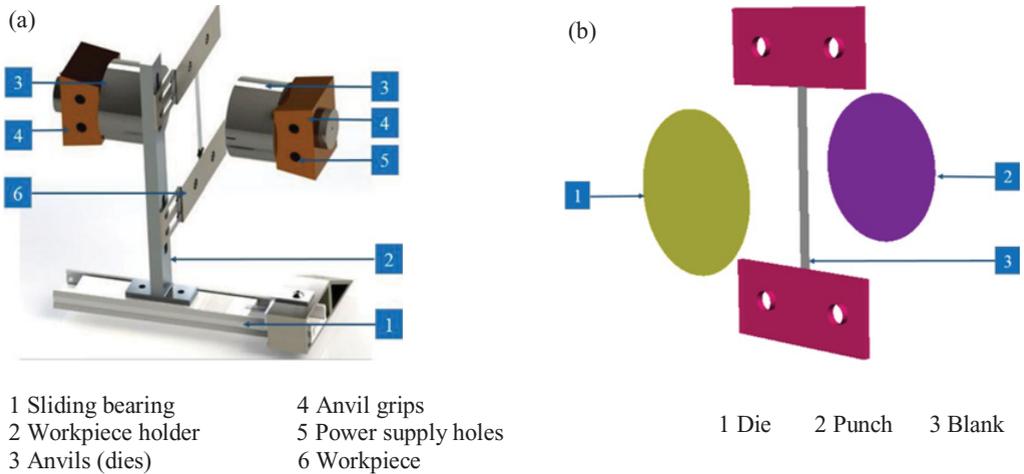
(a) The hot stamping simulator [18], (b) FE model in PAM-STAMP.
